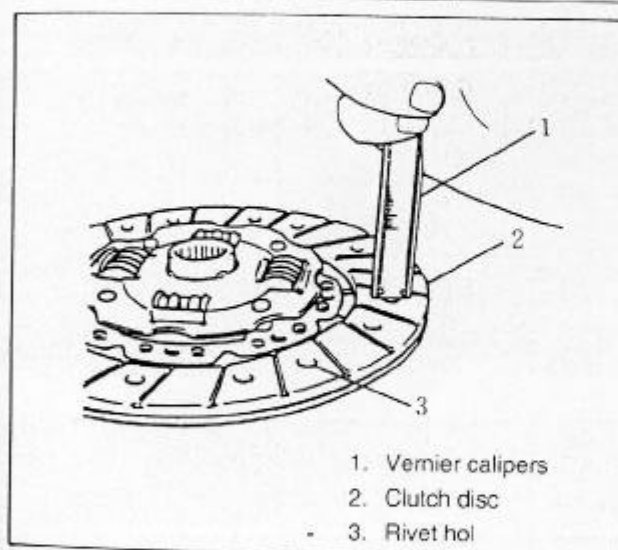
B — 12 MEASURING RIVET HEAD DEPTH
